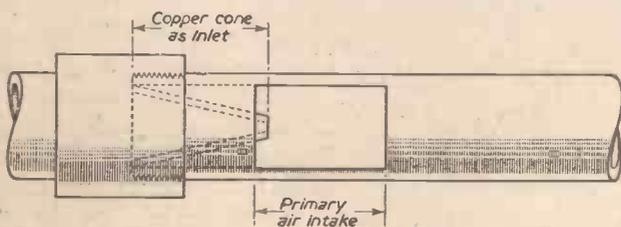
Showing injector made by rolling a copper cone and brazing into mouth of the burner.
